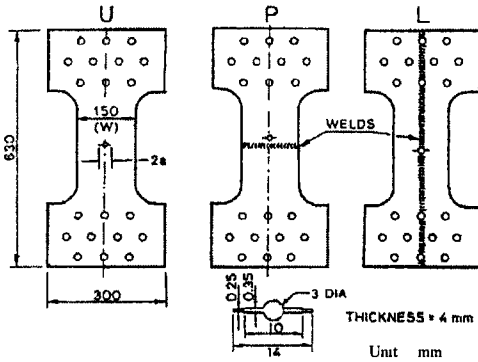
Specimens shape and dimension in Glinka's tests. (U : Unwelded, P : butt perpendicular weld, L : Longitudinal weld).
